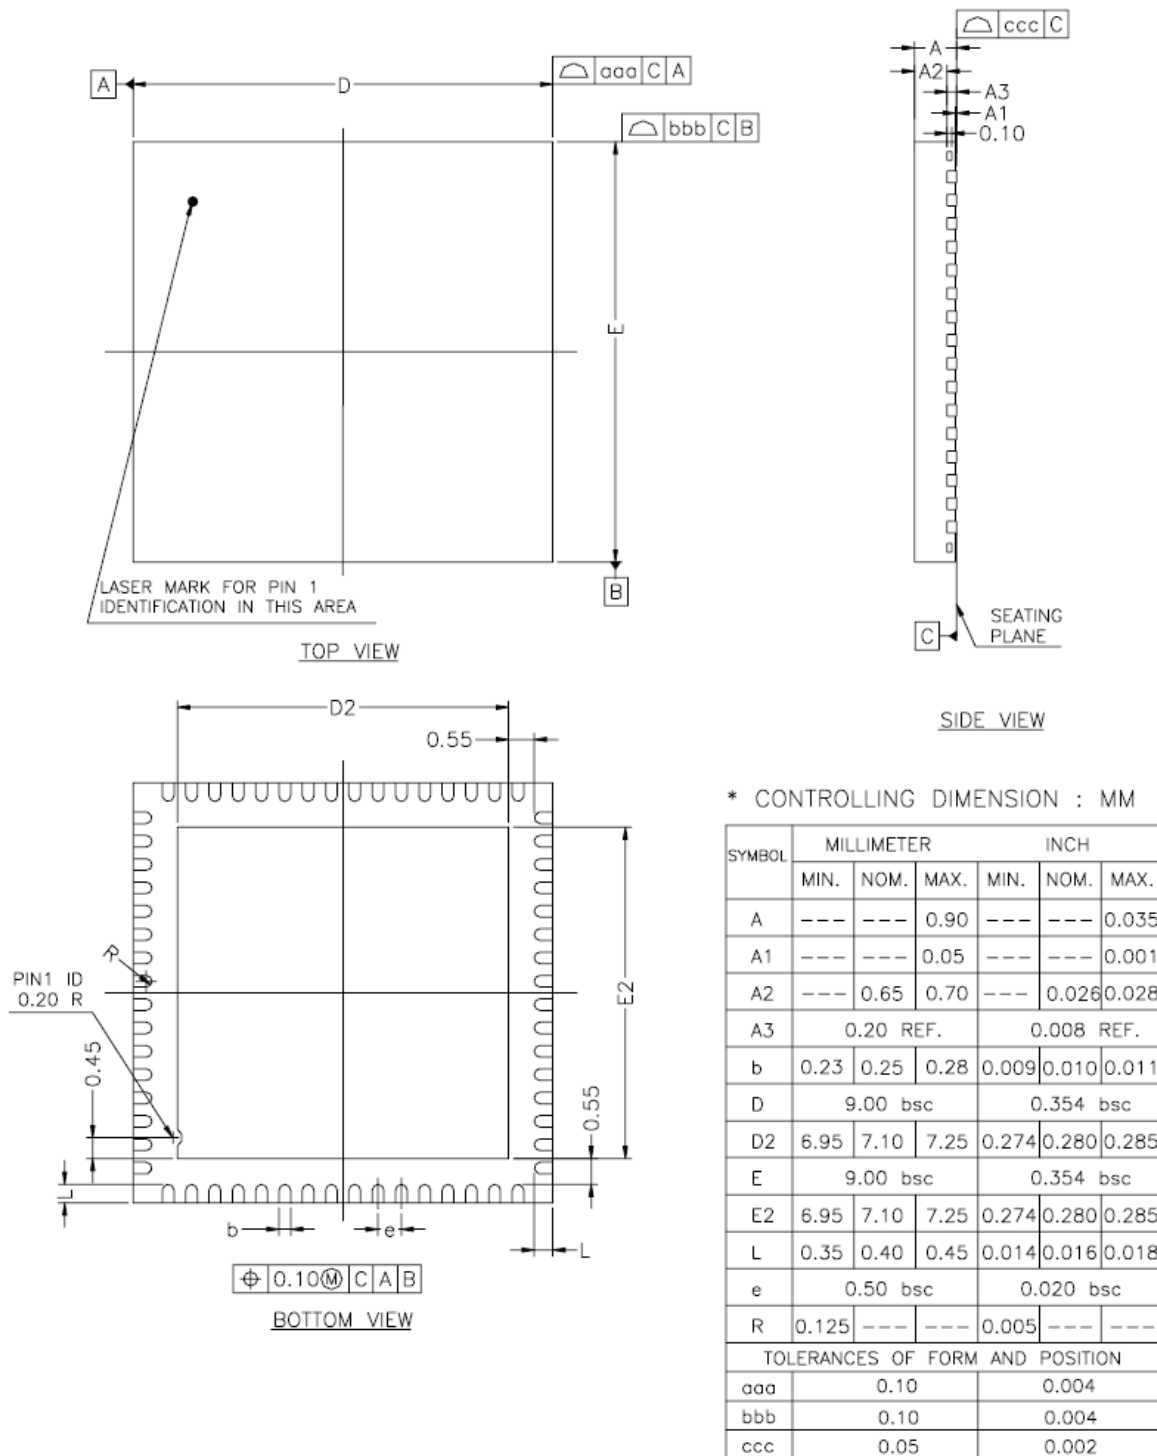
64-lead QFN Package Mechanical Drawing
